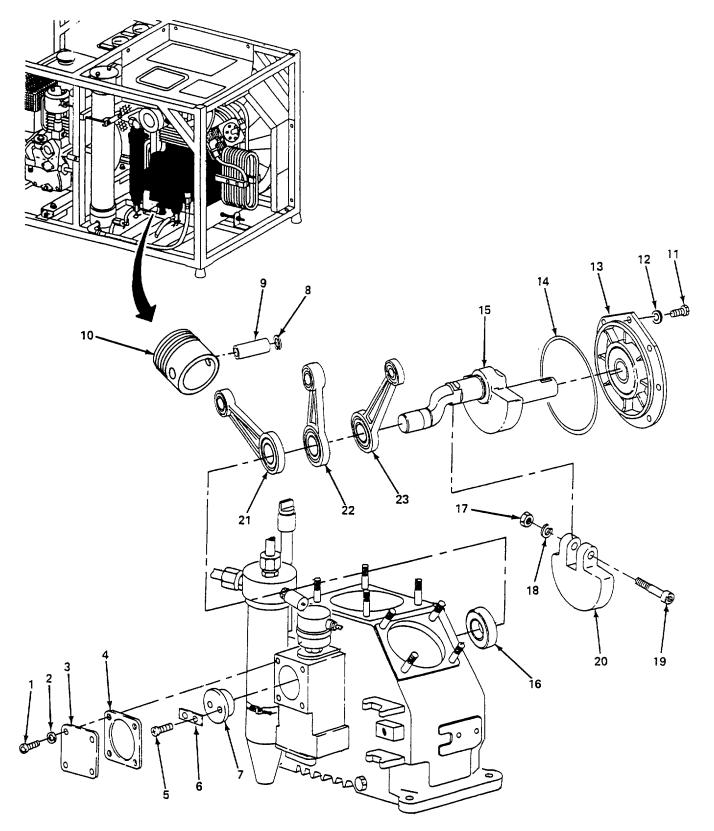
Third Stage Crosshead and Connecting Rod Assembly, Replace.
